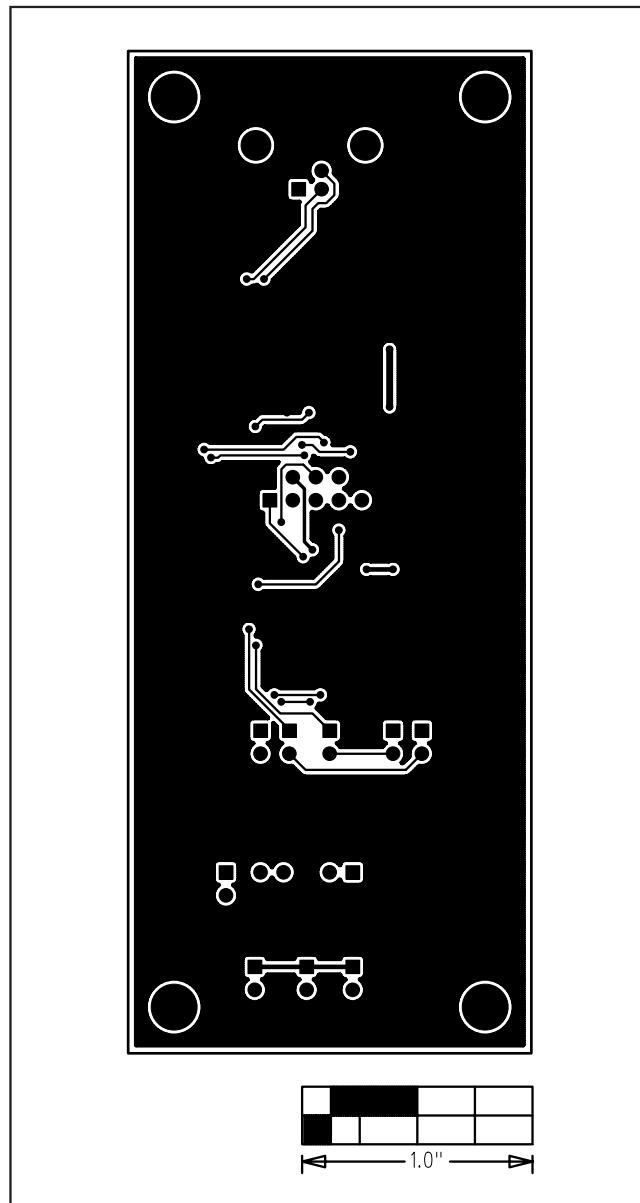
MAX6604 EV Kit PCB Layout—Solder Side
